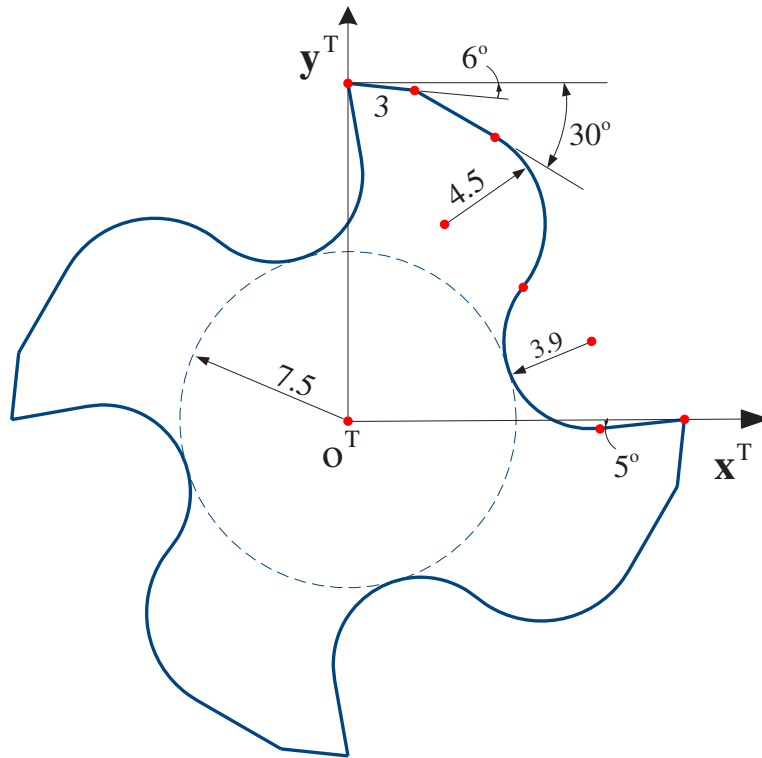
Cylindrical ball end-mill cross-section in mm.
